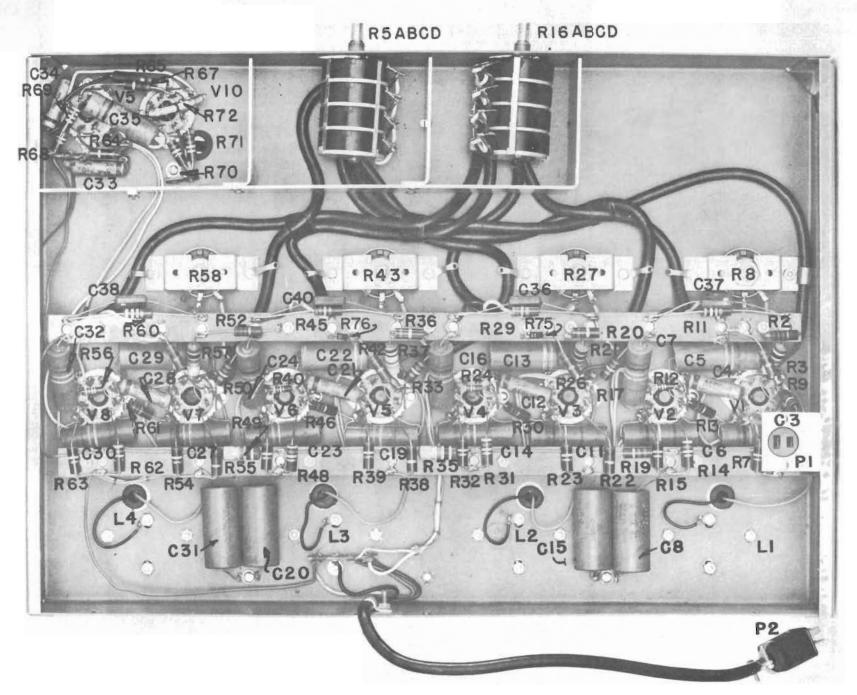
Bottom View of Typical Top Deck With Control Panel and Bottom Plate Removed
